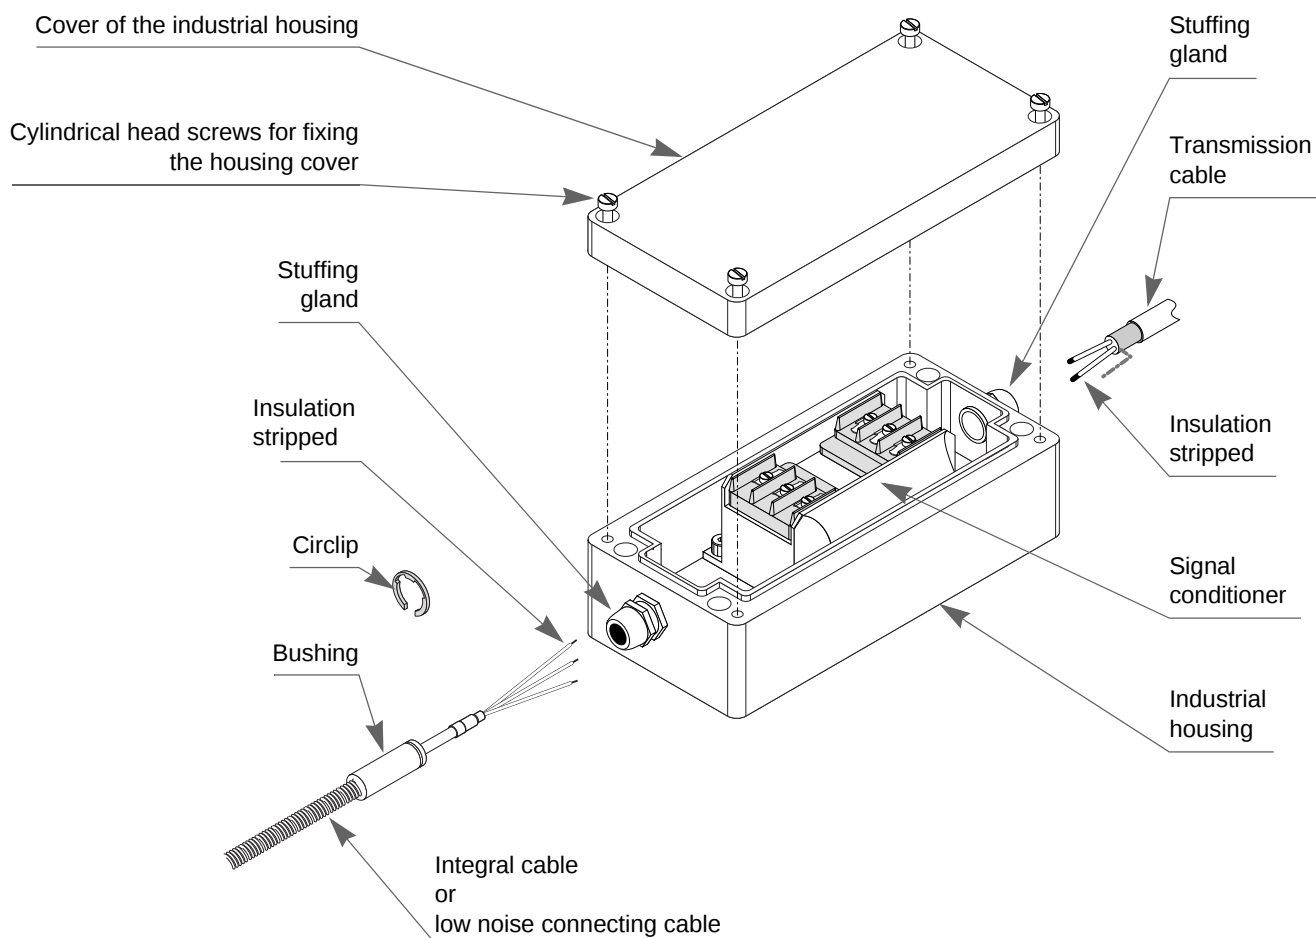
Connecting cables to an IPC 704 signal conditioner
